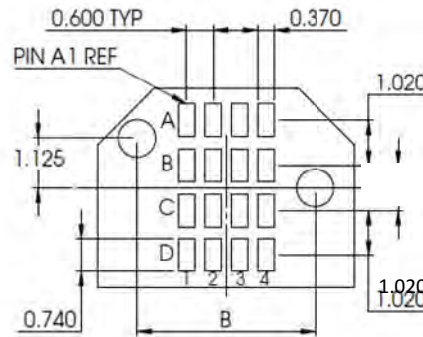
Lynx Detailed Board Layout (General Requirements, Refer to Customer Drawing for specific dimensions)
